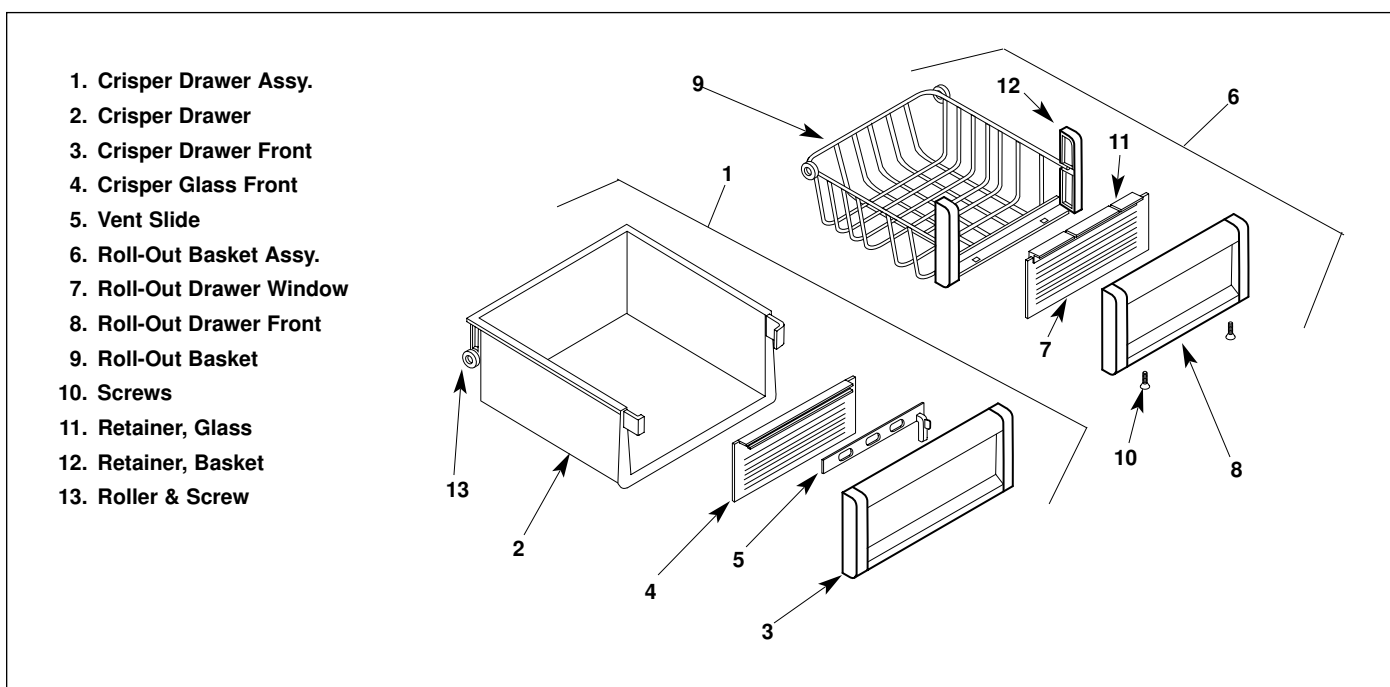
Crisper and Roll-Out Basket Assemblies
